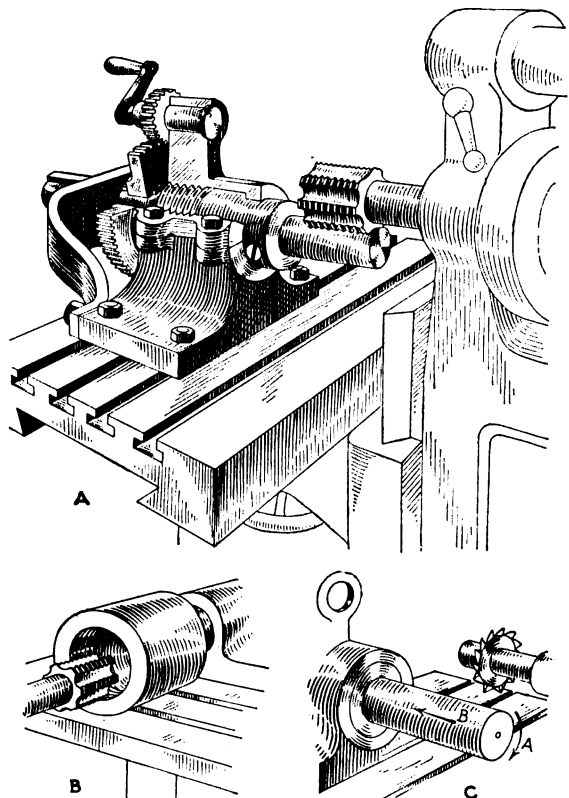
MILLING THREADS WITH A SINGLE CUTTER AND WITH MULTIPLE CUTTERS
